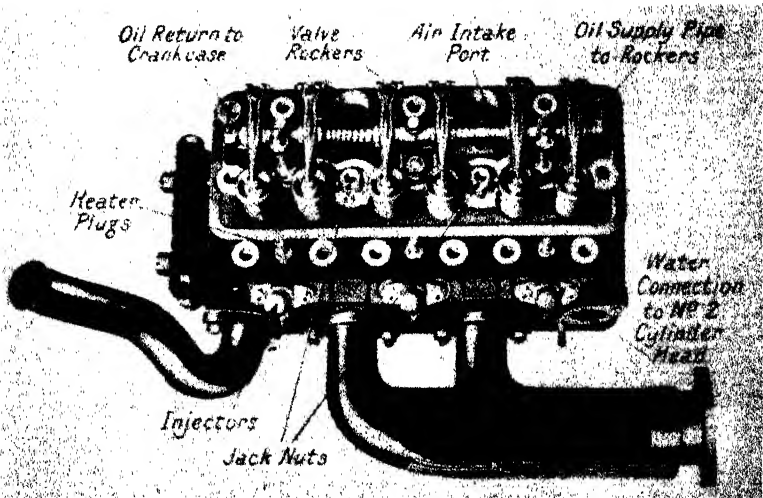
Showing Cylinder Head of A.E.C. Engine.
